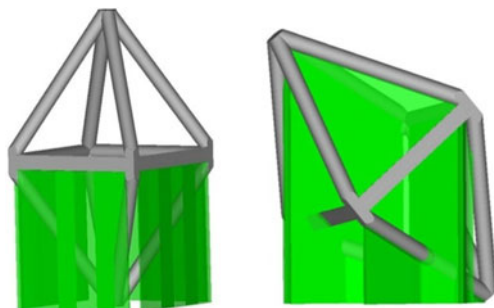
Best (left) and worst (right) building orientation for cell.stl geometry
